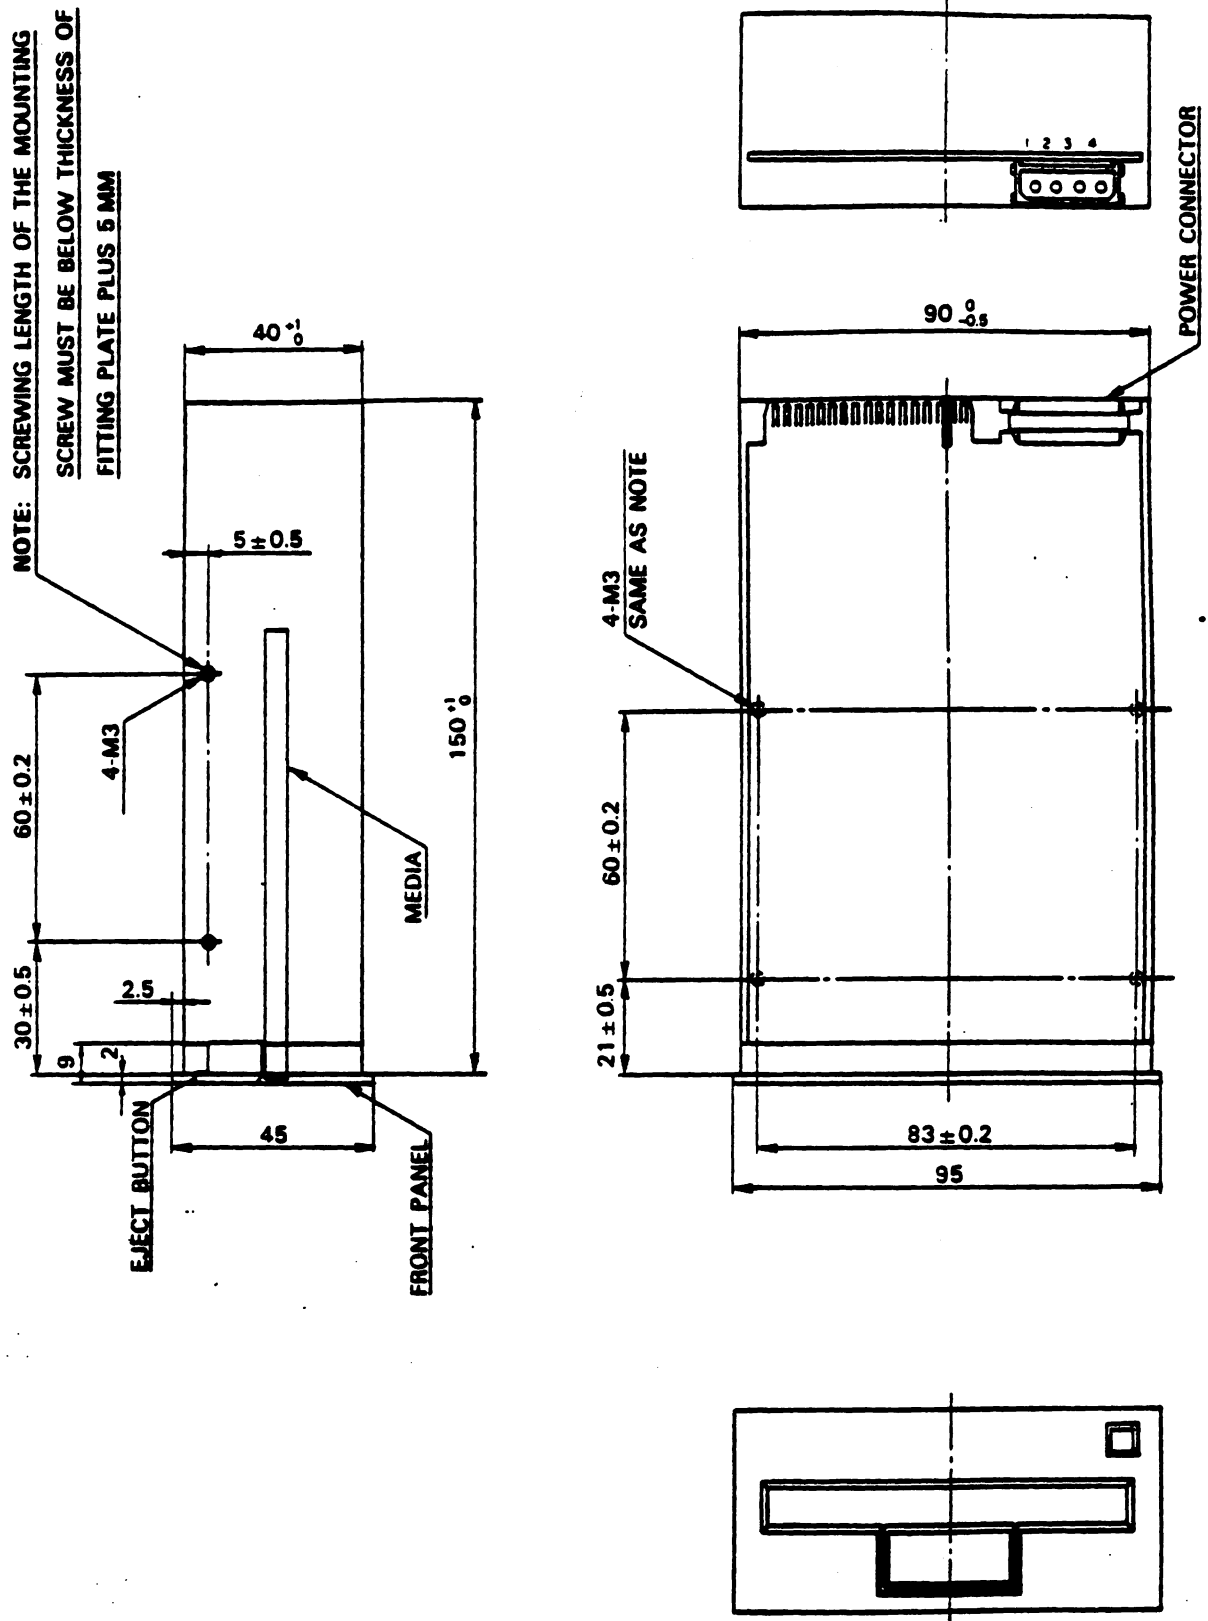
DIAGRAM OF OUTER DIMENSIONS AND MOUNTING DIMENSIONS (HFD 305 SXA)
